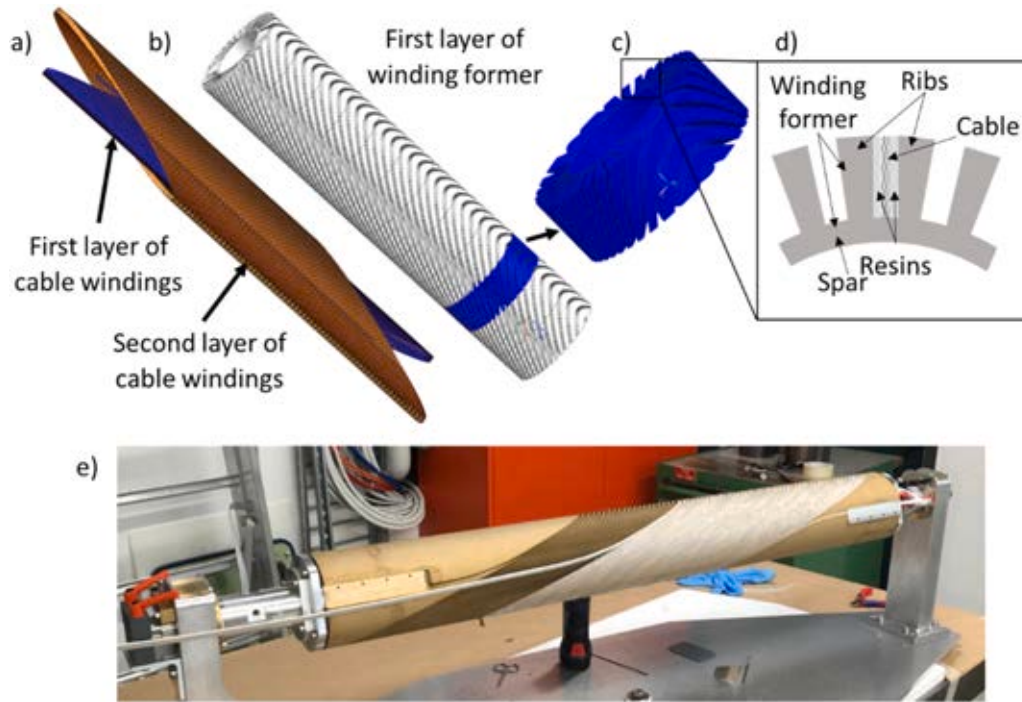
Canted cosine theta coil: (a) two layers of cable windings, (b) layer of the winding former, (c) winding former section, (d) section of the composite assembly, and (e) winding former with cables on a test bench.
